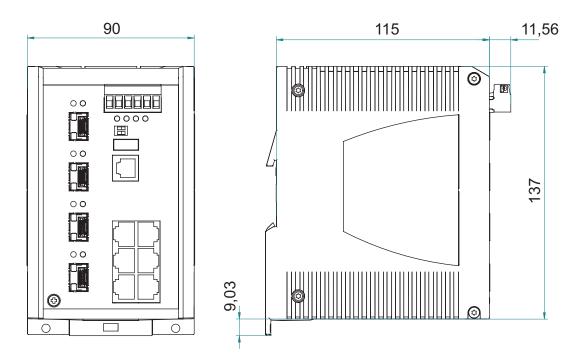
Dimensions of device variants RS22.../RS32... with 8 to max. 10 ports
